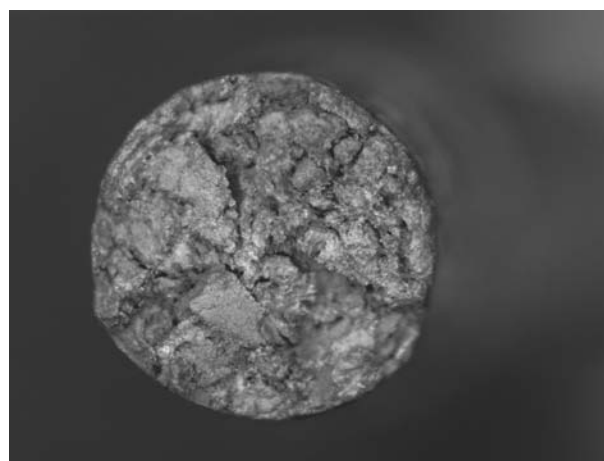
View of the fracture surface of extruded at 170°C S10S60SA materials
